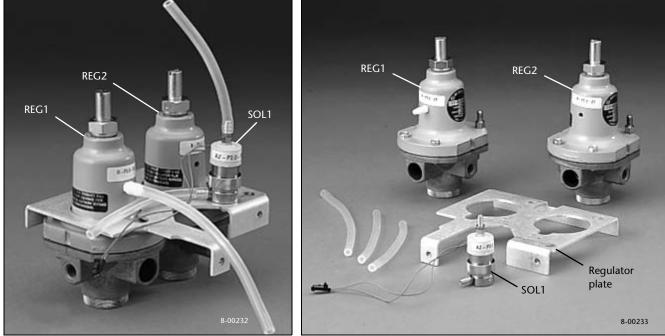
Disassembling flow sensor manifold/regulator assembly/check valve assembly
